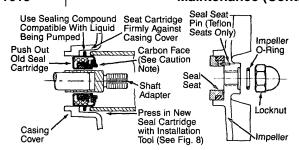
Mechanical Seal Replacement (Teflon Seal Shown)
